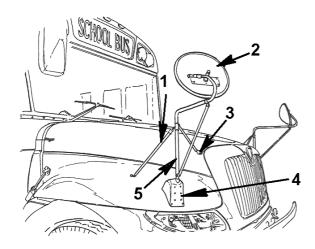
Fender Mounted Mirror (Passenger Side Shown)
